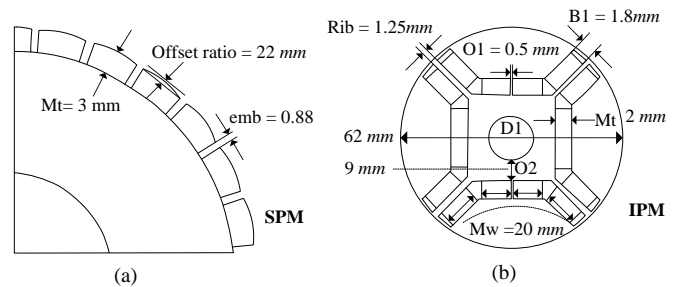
Magnet geometries of a) SPM motor b) IPM motor
